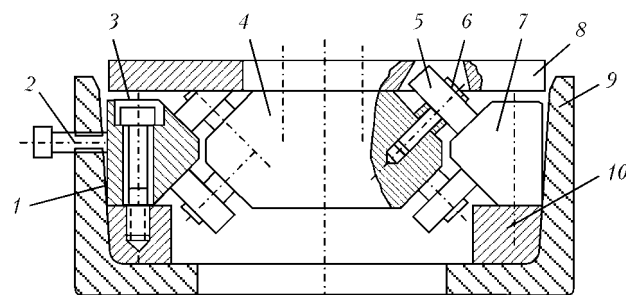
Lens deflection diagram: 1 – adjustable guide; 2 – adjustment screw; 3 – fixing bolt; 4 – body of lens carriage; 5 – rolling bearing; 6 – bearing axle; 7 – uncontrolled guide; 8 – lens mounting plate; 9 – console; 10 – the guide supports
